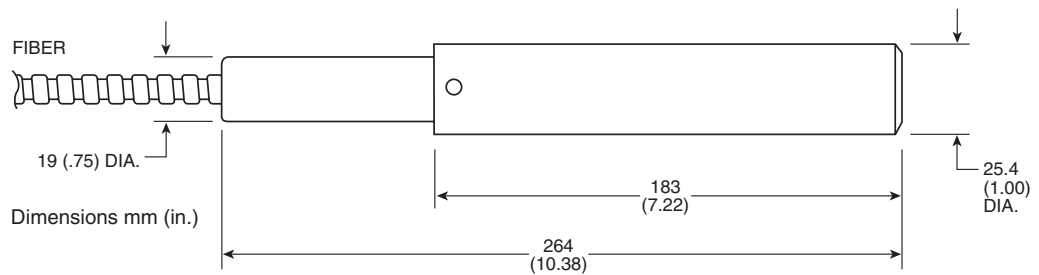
Optical Lens Assembly (L1) .076" @ 6" FOV
